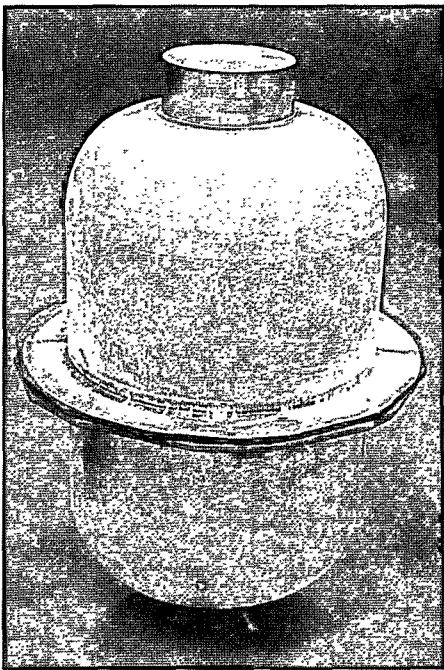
Ti6Al4V high pressure vessel manufactured using the SPF/DB process.
